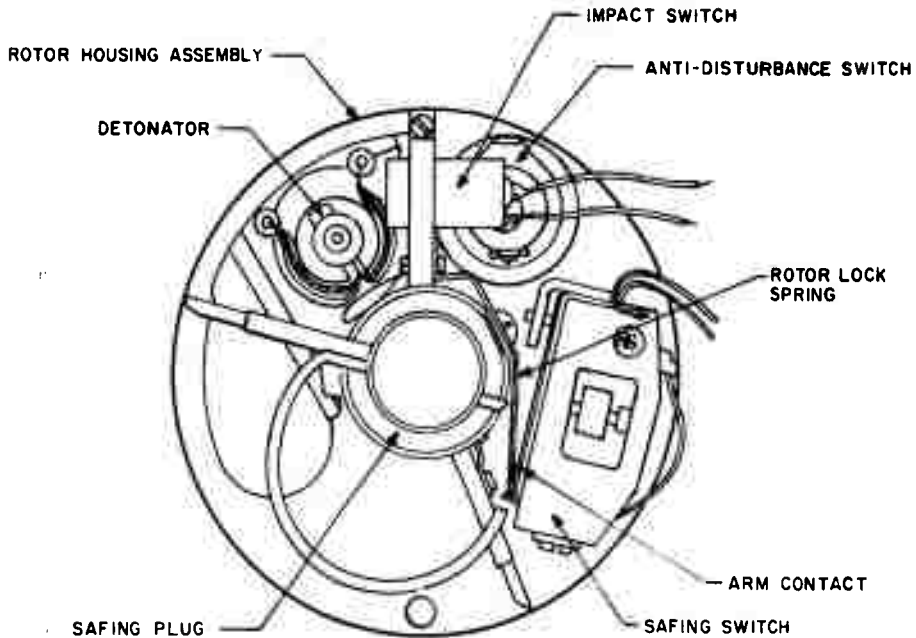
Typical Safing Switch Mounting in Rotor Housing
